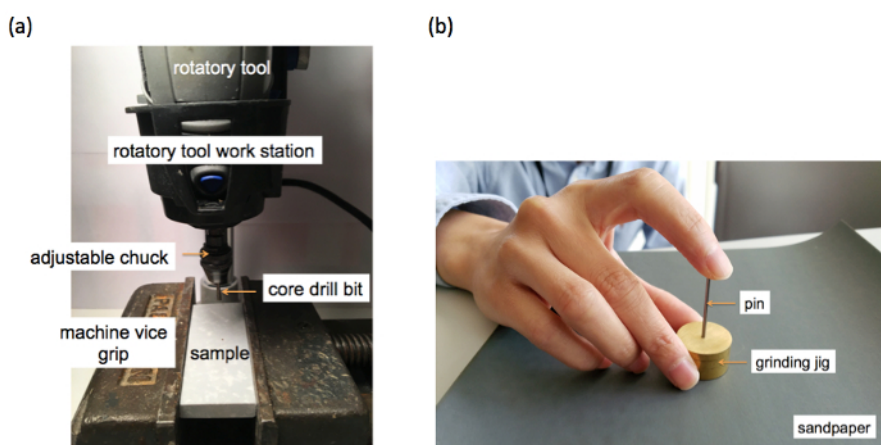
Sample Preparation. (a) Core drilling using a rotatory tool with the rotatory workstation package setup as a coring drill press. (b) Surface grinding of the end surface of the core sample with a grinding jig (a metal cylinder with a drilled hole). [Please click here to view a larger version of this figure.](#)
